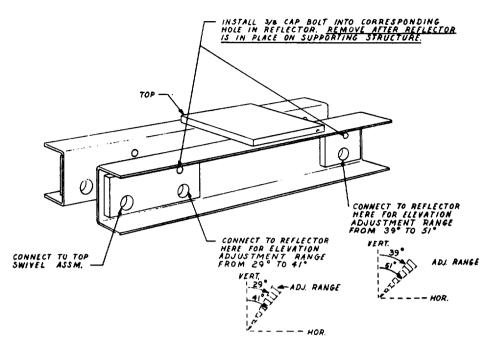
Top Mount Assembly — KS-16320 Passive Reflector
